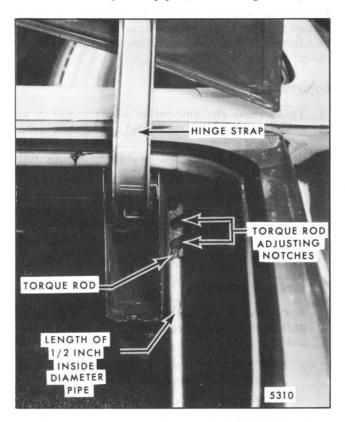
Rear Compartment Torque Rod Adjustment - "A" Styles Shown, "B-C" Style Similar
